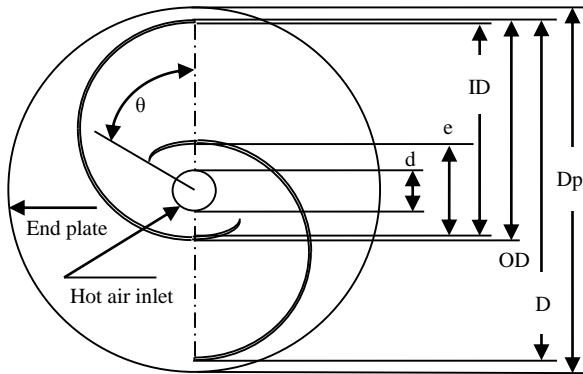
Blade geometry on the bottom end plate of the swirling rotor
